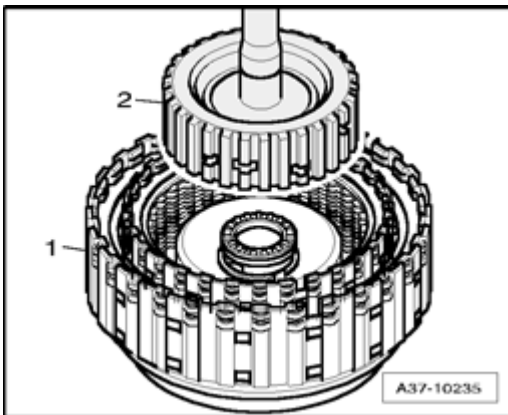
Intermediate Shaft With Inner Plate Carrier "A" And Clutch "A/B"
